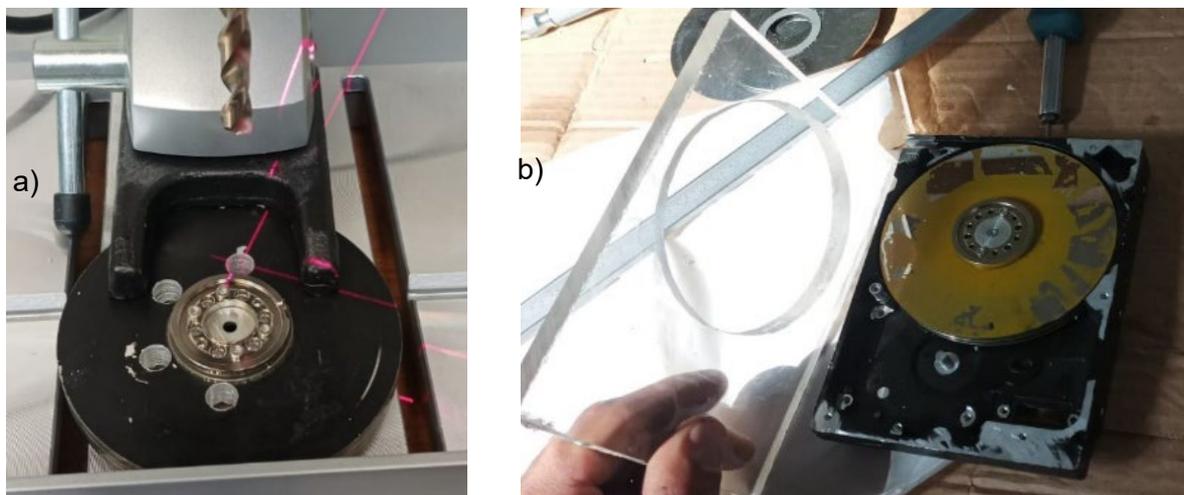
Manufacturing the Tesla turbine for the experiments: turbine rotor (a) and case (b)
